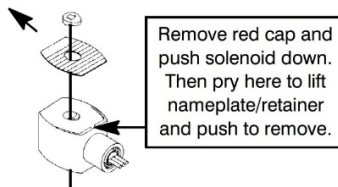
How to remove the Red Cap from the Solenoid Base
